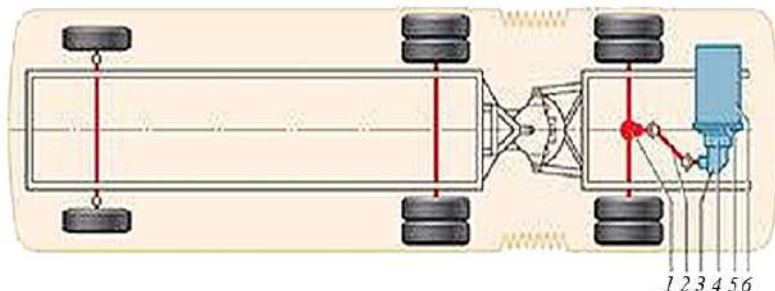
Articulated bus with push-pull rear section with transverse engine location in the rear trailer section: 1- main gear; 2- cardan transmission; 3- angular gearbox; 4- gearbox; 5- clutch; 6- engine
